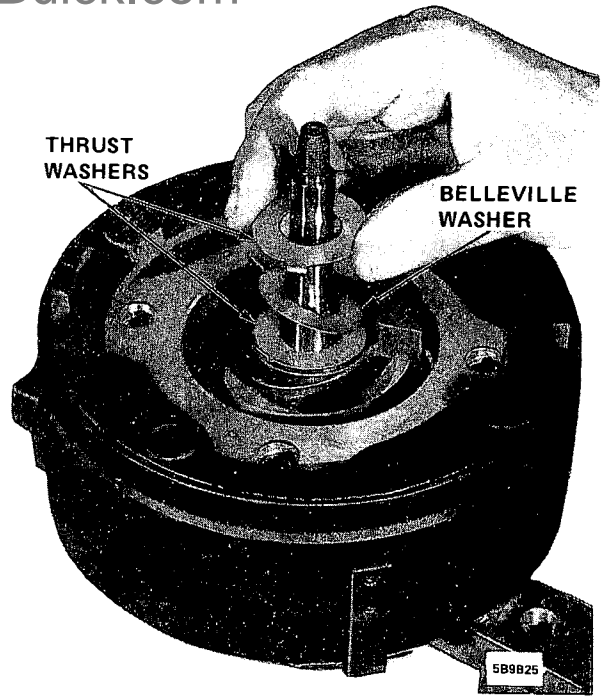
B-50 - Installing Thrust and Belleville Washers - 4 Cylinder Compressor
